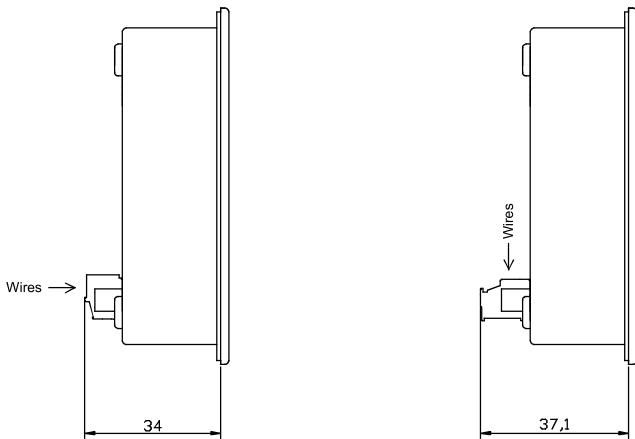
TDC130 mechanical drawing plug-in connector – minimum required space for mating connector
